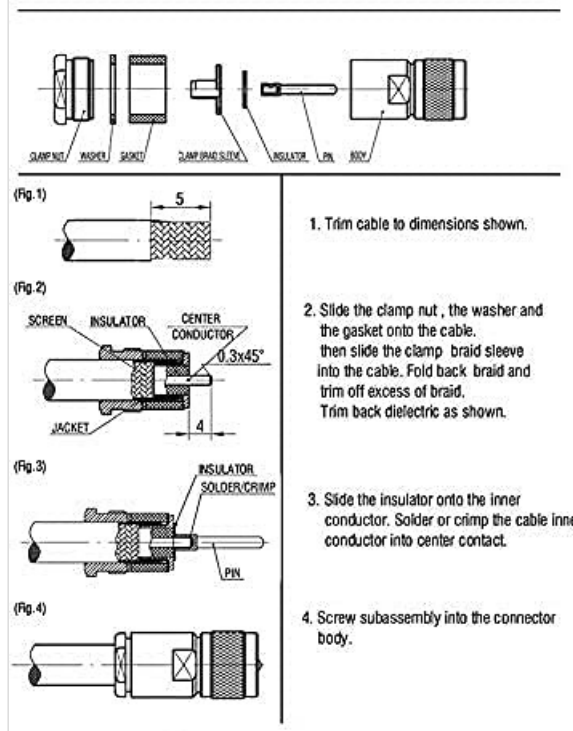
Assembly diagram for UHF series connectors, illustrating cable preparation and component placement with specific dimensions.
